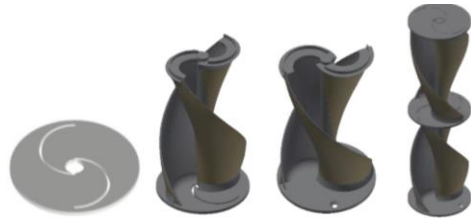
Assembly of the structure of the Savonius turbine with its 2 stages, helical blades and shaft.
